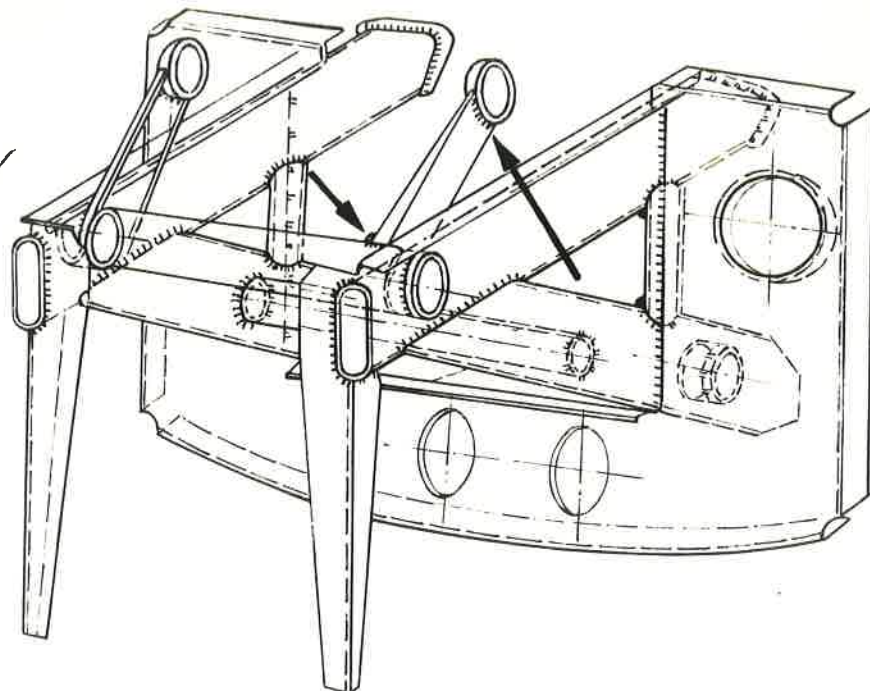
Check of the undercarriage silencer mounts and the undercarriage mounting structure for cracks.
